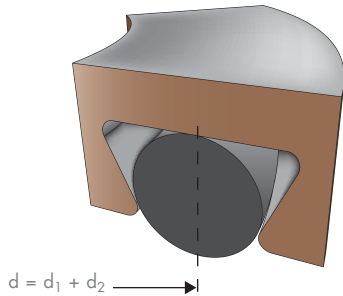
Static axial (flange seal – trapezoidal or dovetail groove)
